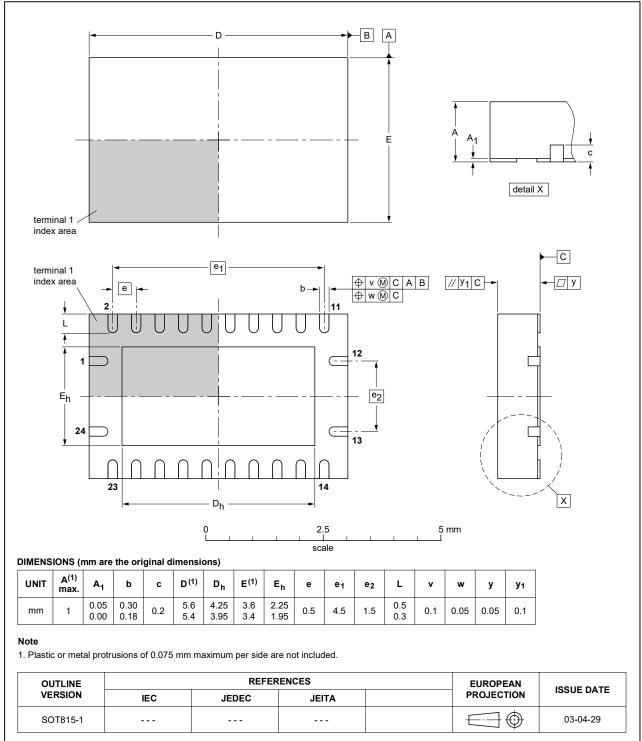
Package outline SOT815-1 (DHVQFN24)
